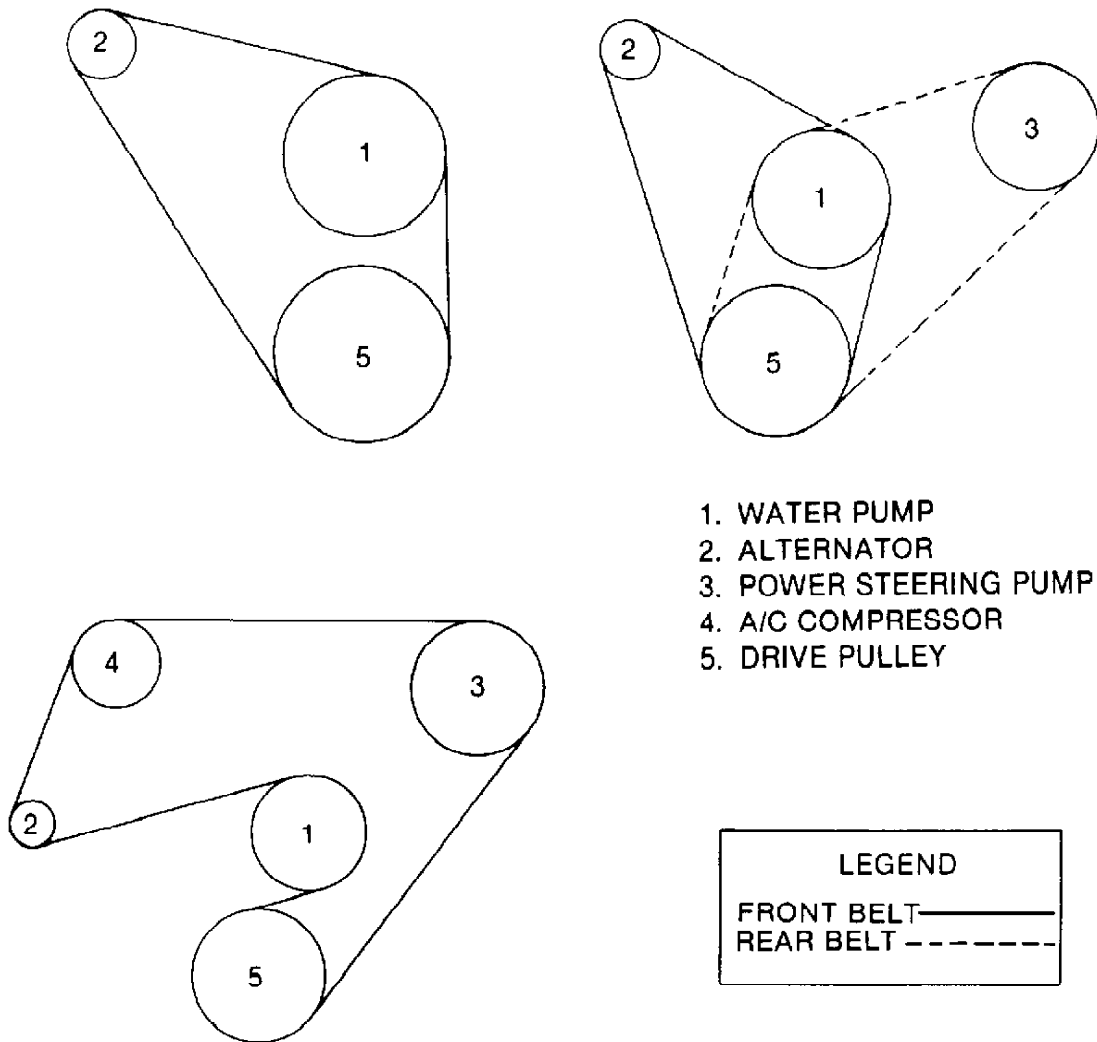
Drive Belt Arrangement: 1983-88 2.5L Wrangler
